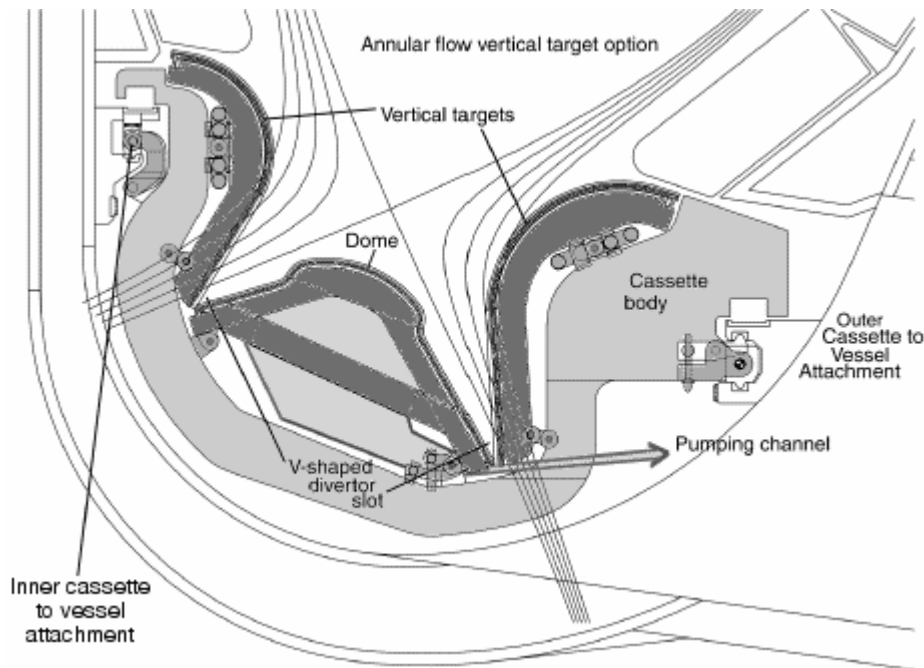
Detailed drawing of the ITER divertor<sup>6</sup>
